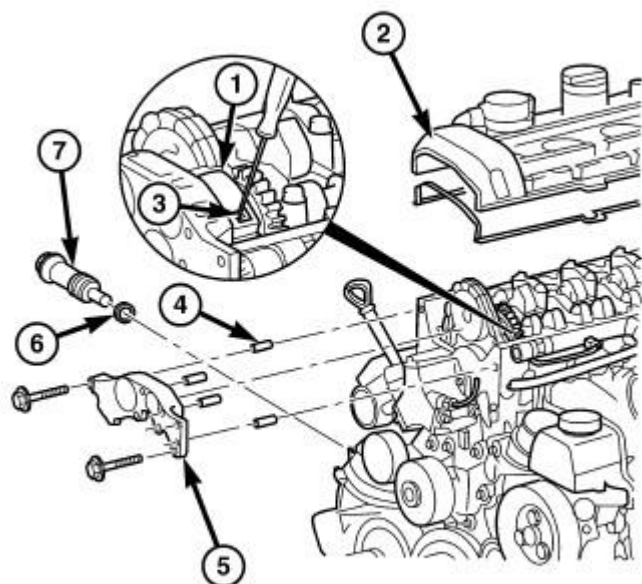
Special Tool 8929-Camshaft Locking Pin
